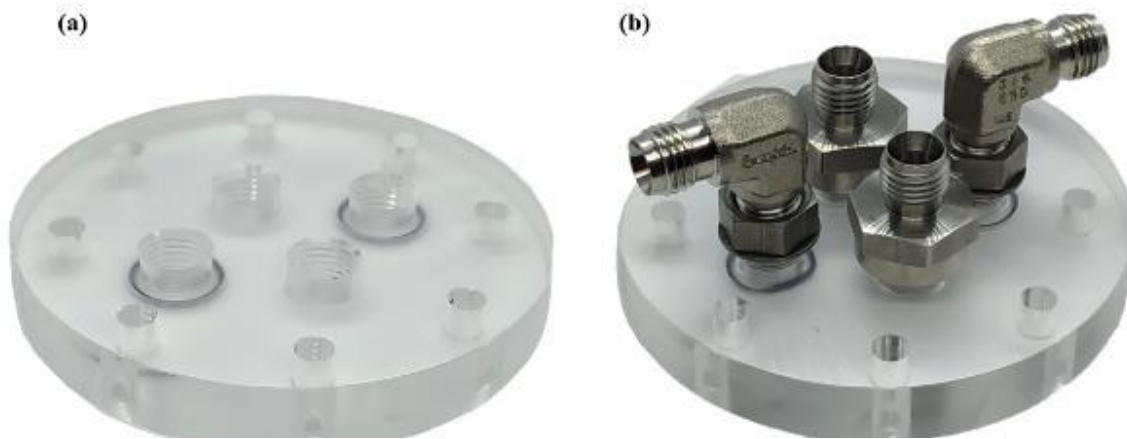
(a) Photograph of cover with the O-Rings in place. (b) Photograph of cover with the face-sealing fittings threaded on top.
